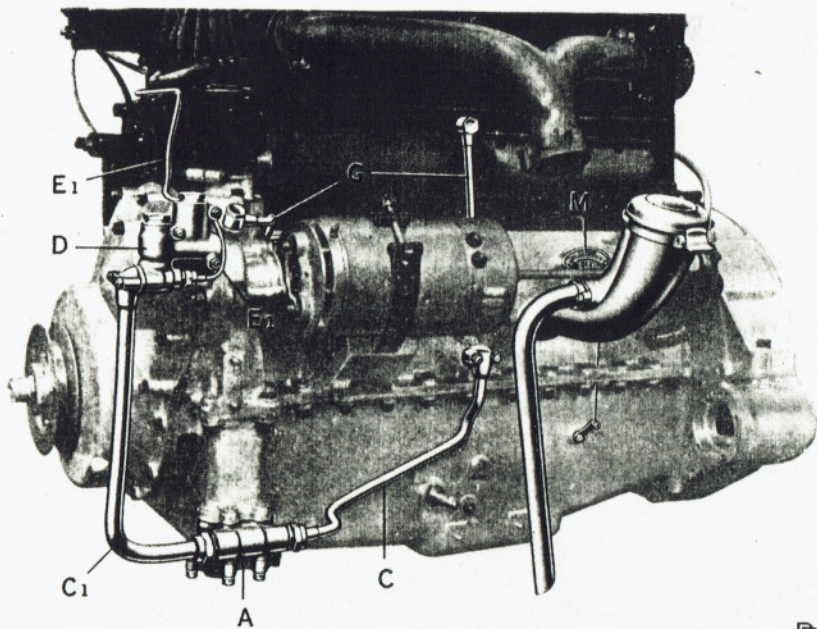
ENGINE OIL PUMP RELIEF VALVE, FILLER AND LEVEL INDICATOR.
